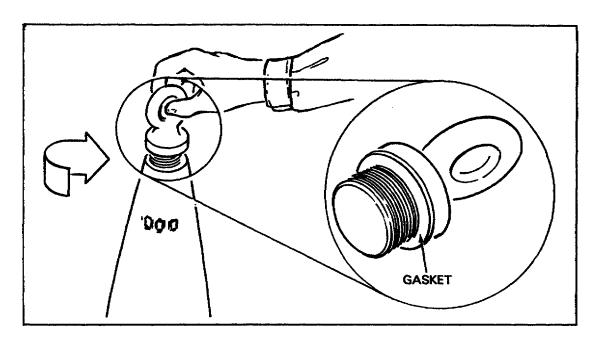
Threading the Eyebolt Lifting Plug into the Fuze Well.
